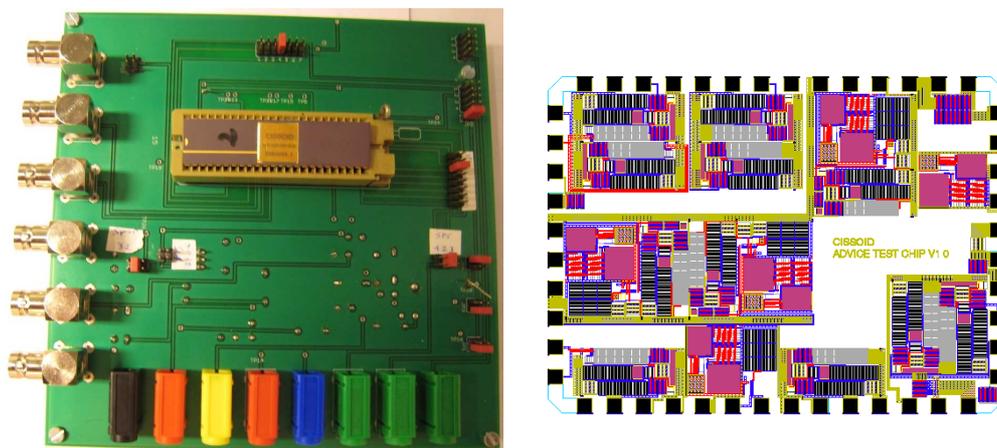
Printed Circuit Board (PCB) development, test PCB with SOI chip version 1.0
